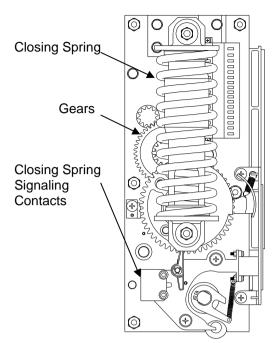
Universal Mechanism Assembly (UMA) Left Side View
